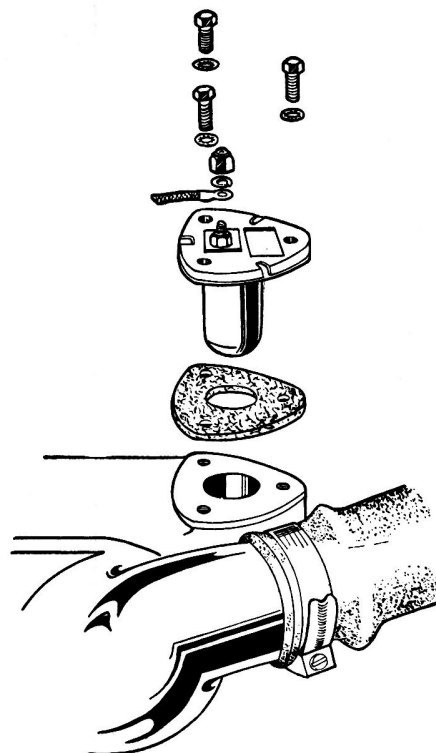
The auxiliary starting carburettor thermostatic switch
